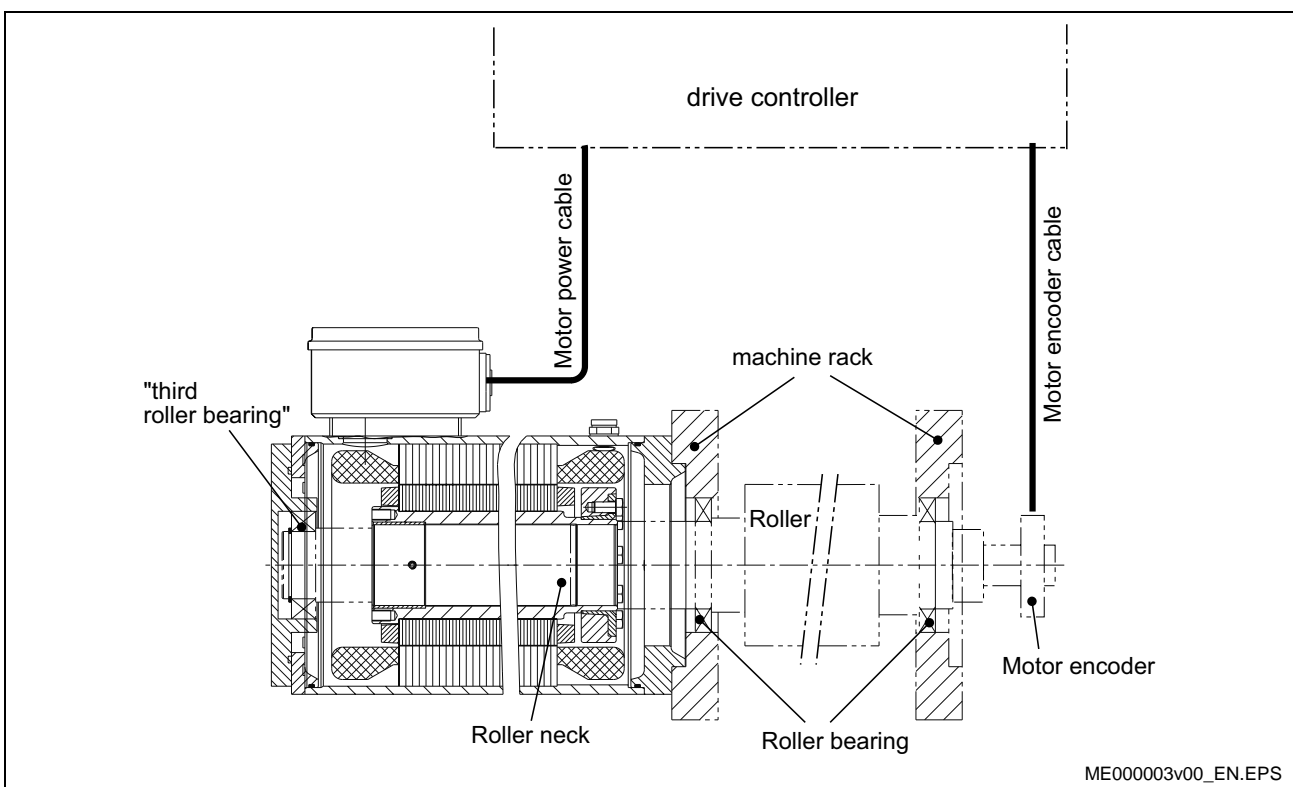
Sample structure of a directly driven printing roller with a MBW roller motor kit
